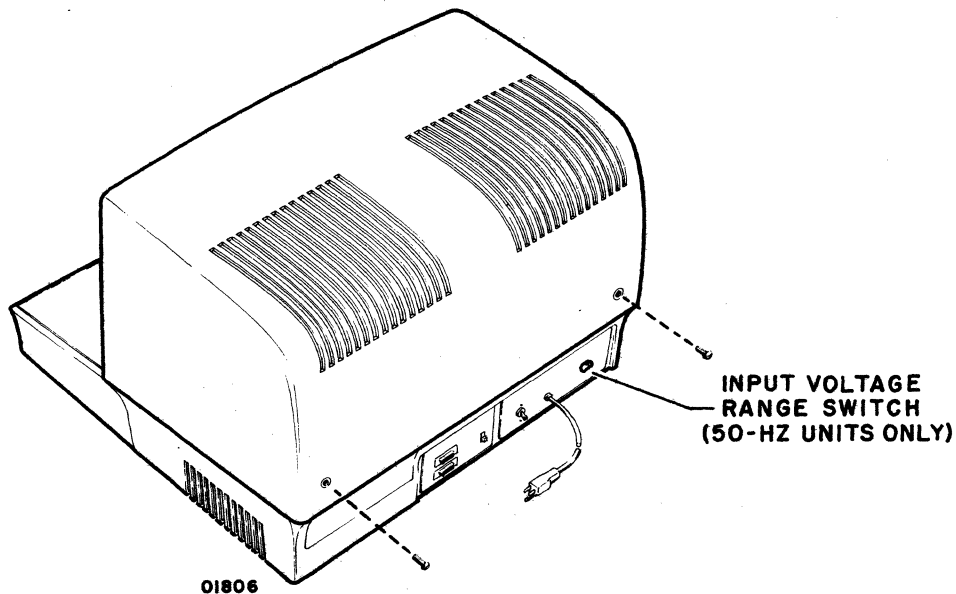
Cabinet Hood Removal and 50-Hz Voltage
